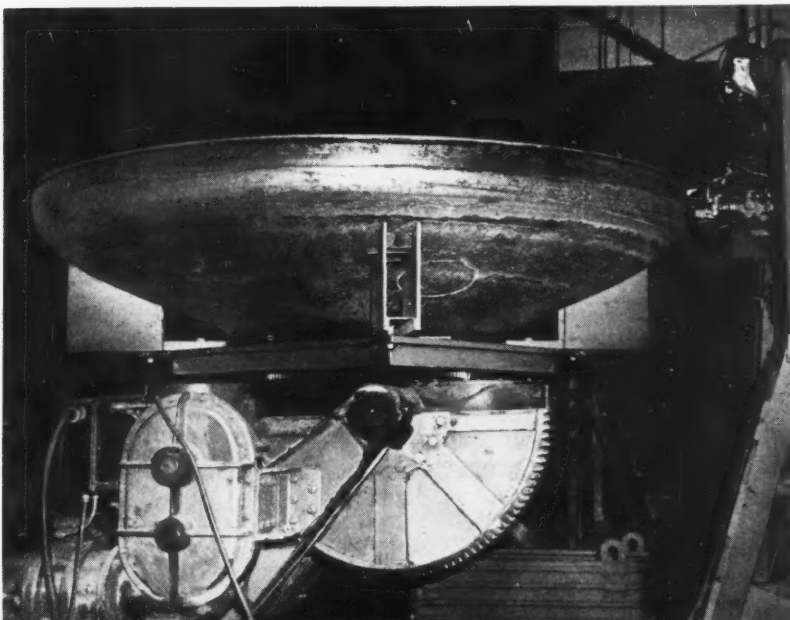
Edge of a dished head, which is mounted on a standard welding positioner, is formed by rotating it past a standard plate-edge preparation unit
